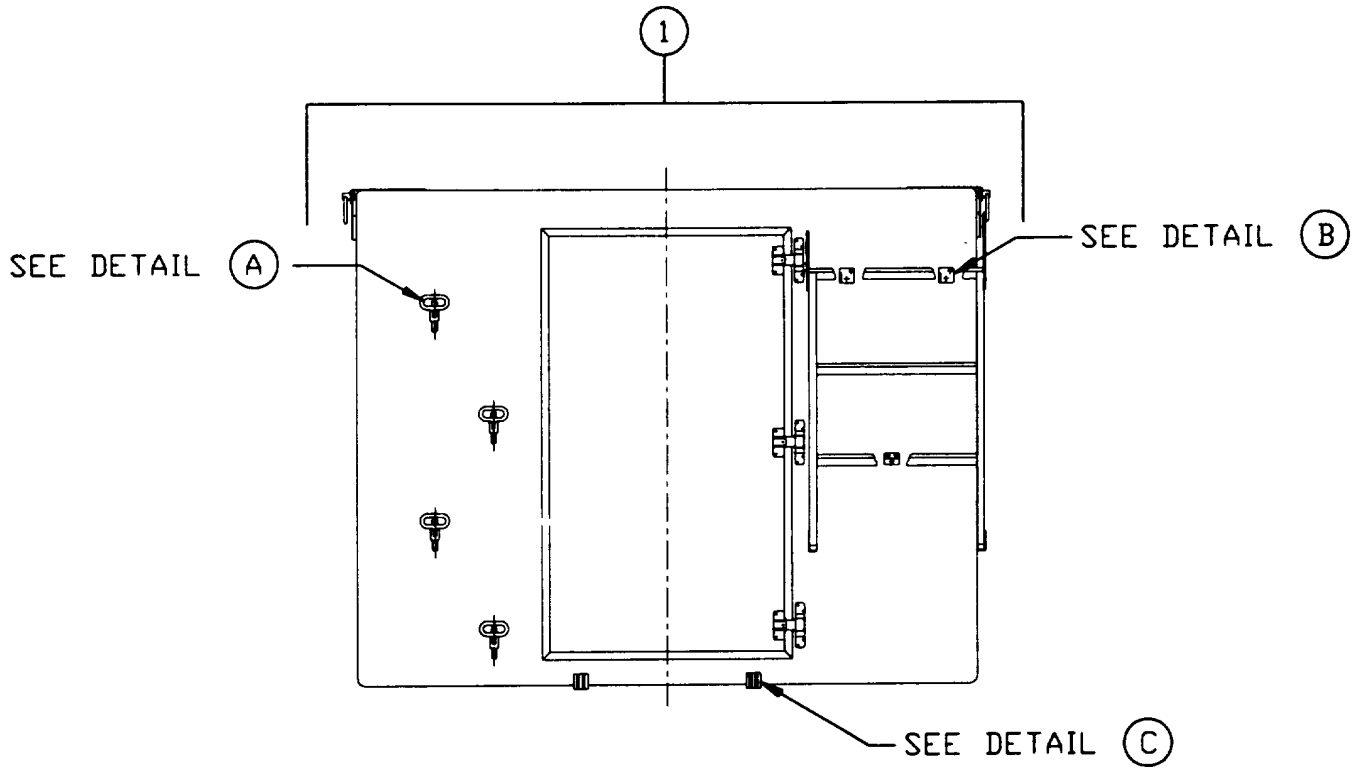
STEP AND LADDER ASSEMBLY (SHEET 1 OF 4)
